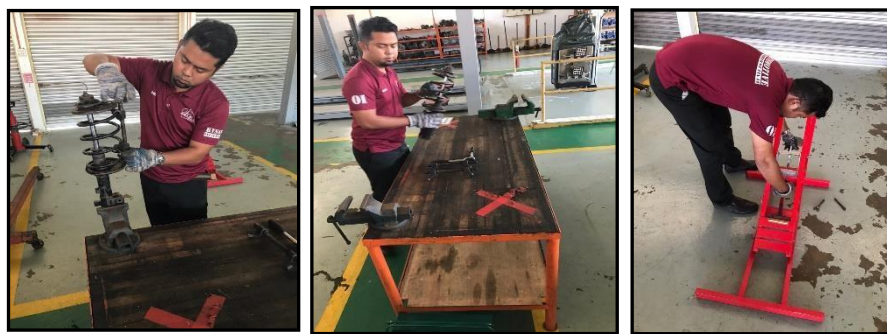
Opening and Installing Spring on Absorber by Using Spring Clamp and Spring Compressor
